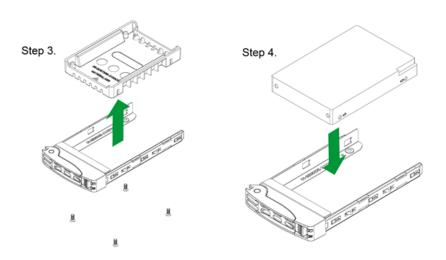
Installing a 2.5" Drive into a Drive Carrier
